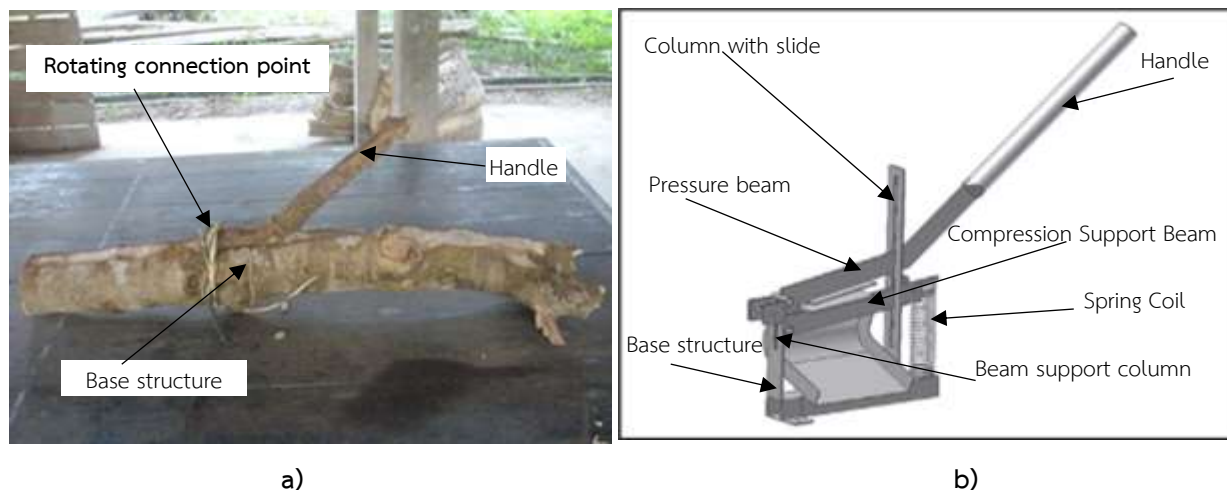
a) Traditional manual compressing equipment b) Pressing equipment type cut calyx with compression
